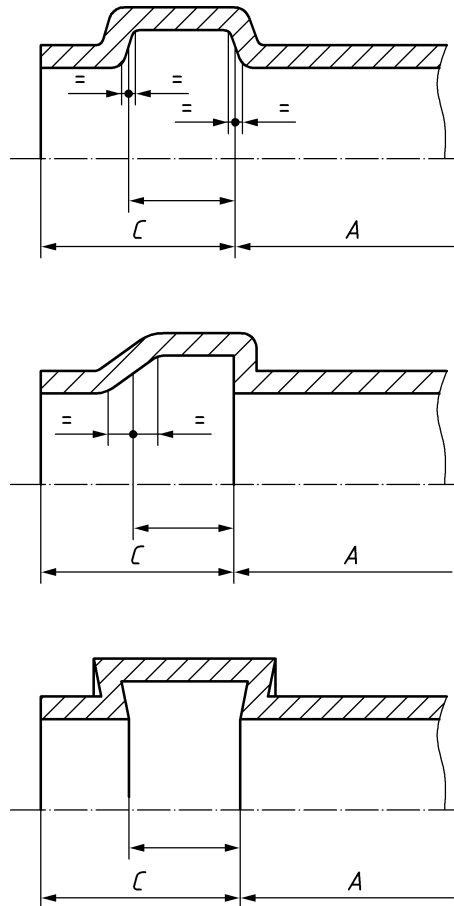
Typical groove designs for elastomeric ring seal sockets
